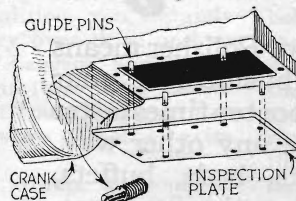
This guide pin makes it easy to remove oil pan on Ford
